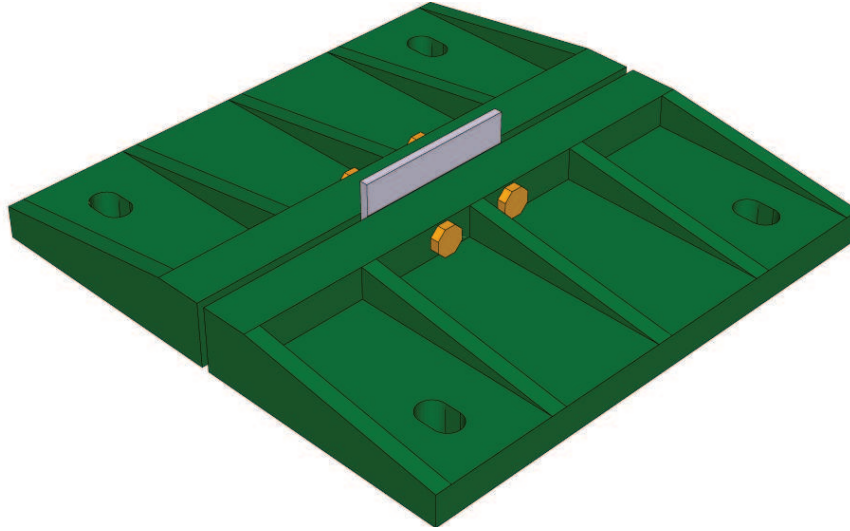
CAD Model of Test Fixture Used in Controlled Geometry Rolling
